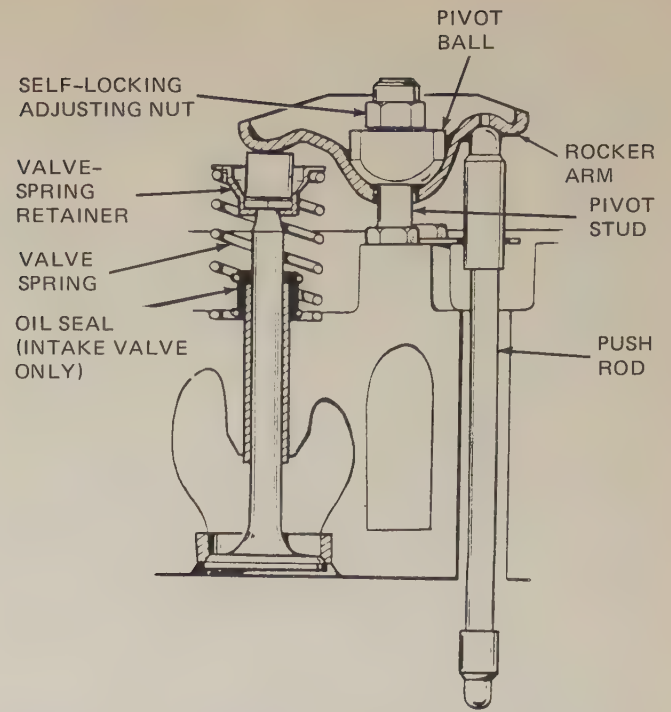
Overhead-valve train for a small engine. (Onan Corporation)
